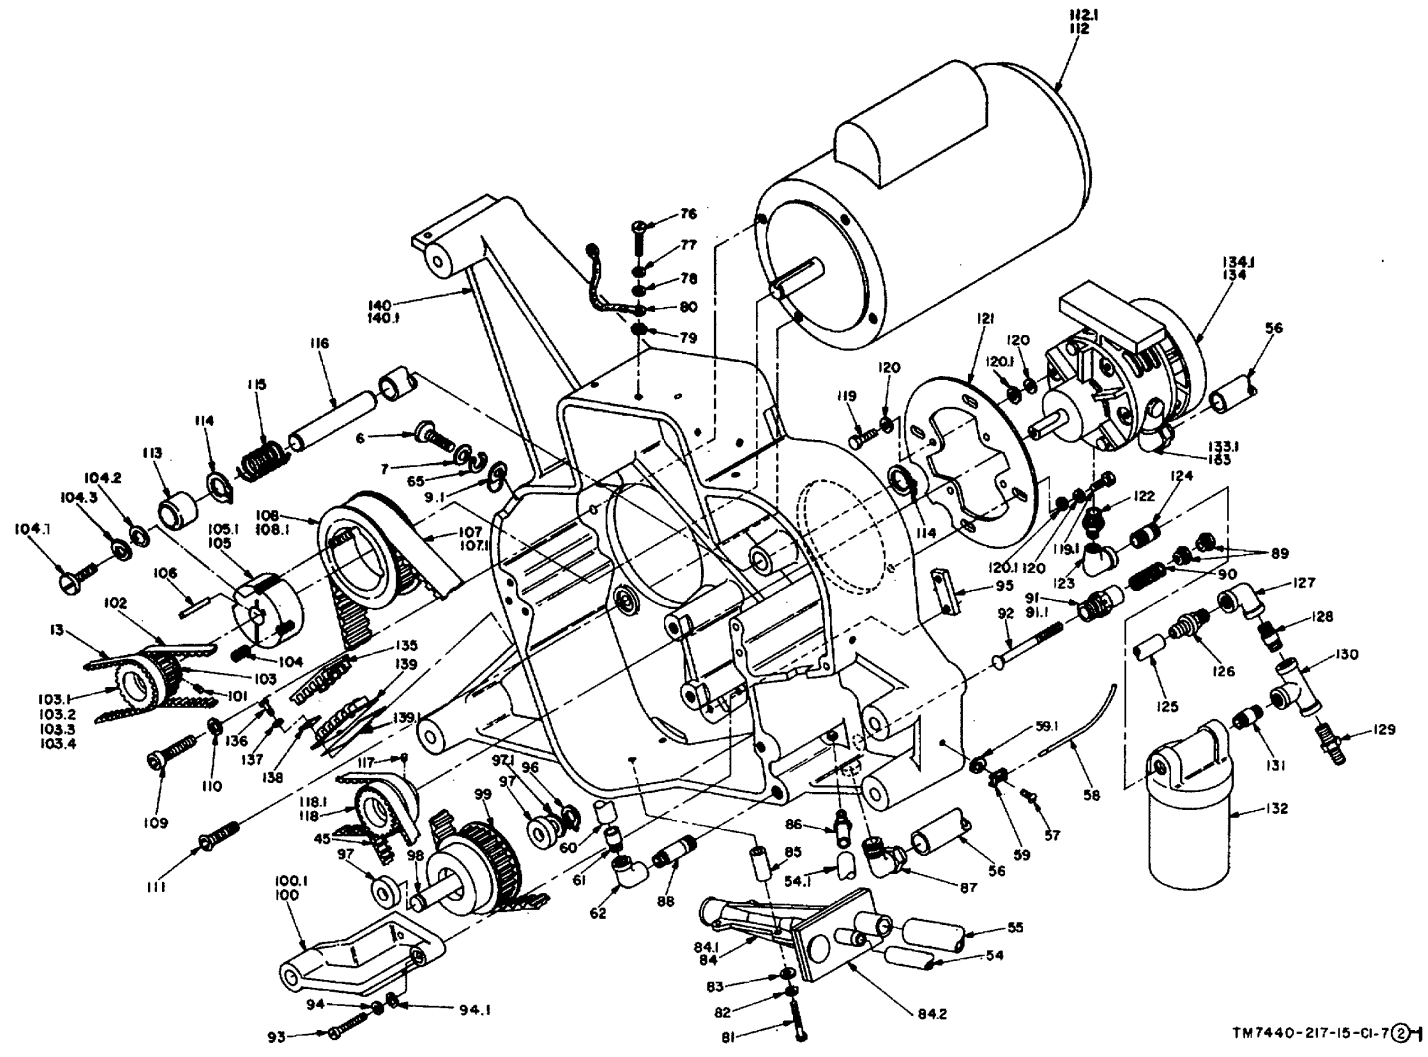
Punch head assembly, exploded view. (Part 2 of 3)
